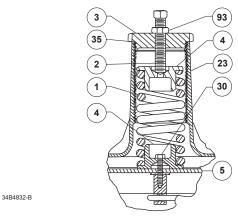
Type Y692 with a Heavy Control Spring Assembly
